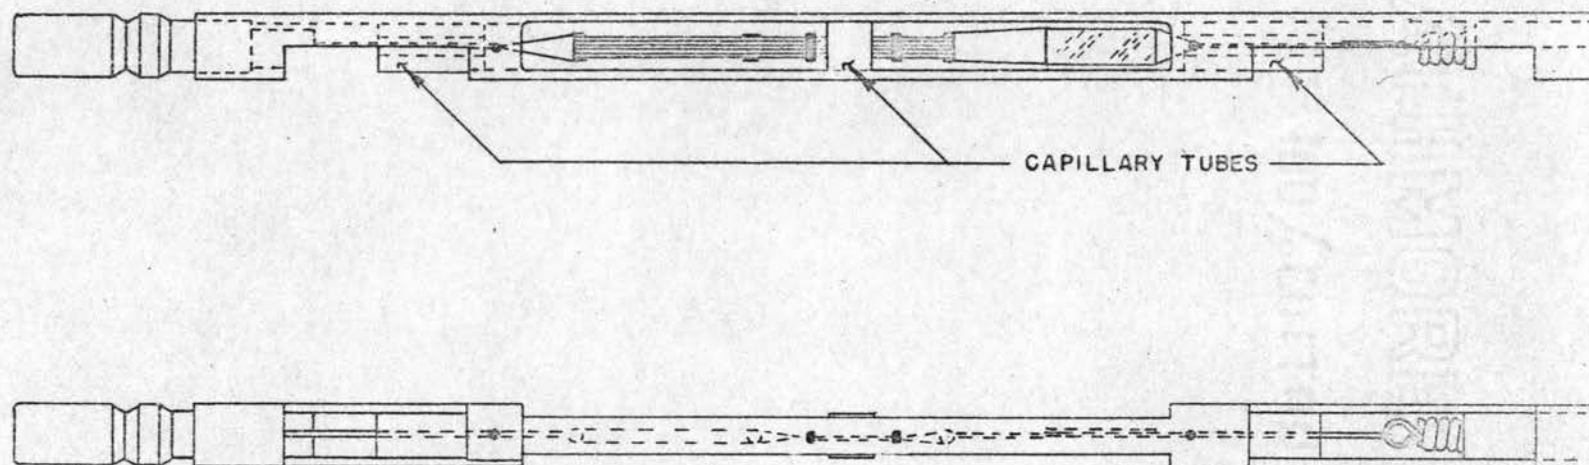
Three-Capillary Tube Coil and Frame Assembly of The Three-Bead Coil Type.
